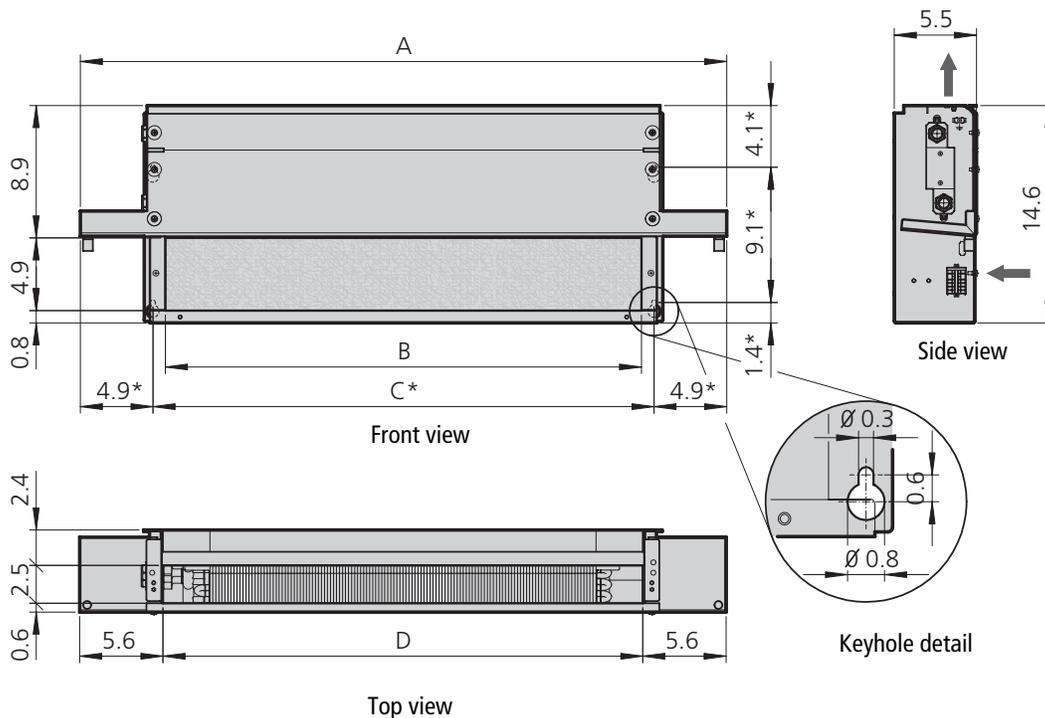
Dimensions of basic unit and mounting points* [inch]
